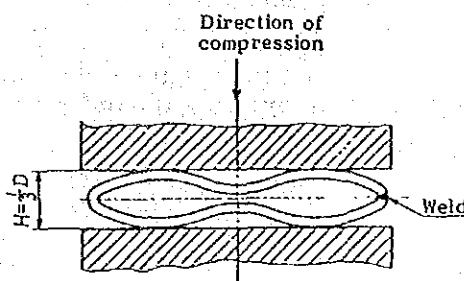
Flattening Test of the Portion other than Welds
